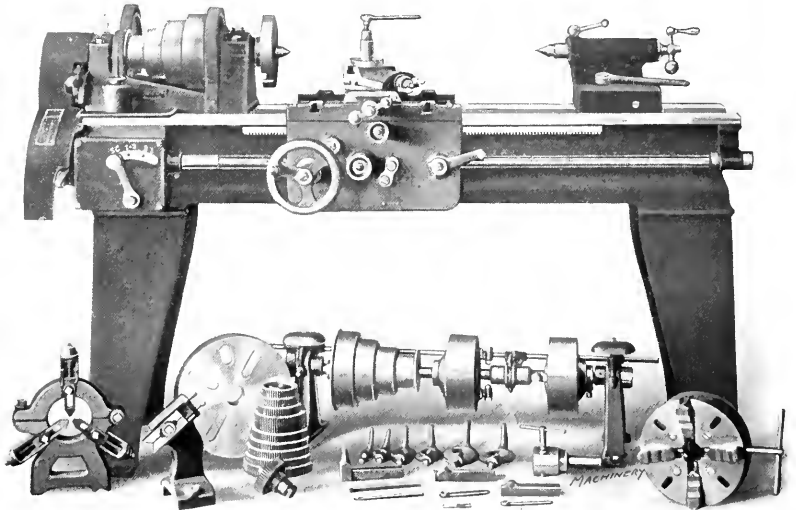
Carroll-Jamieson 13-inch Back-geared Screw-cutting Lathe
